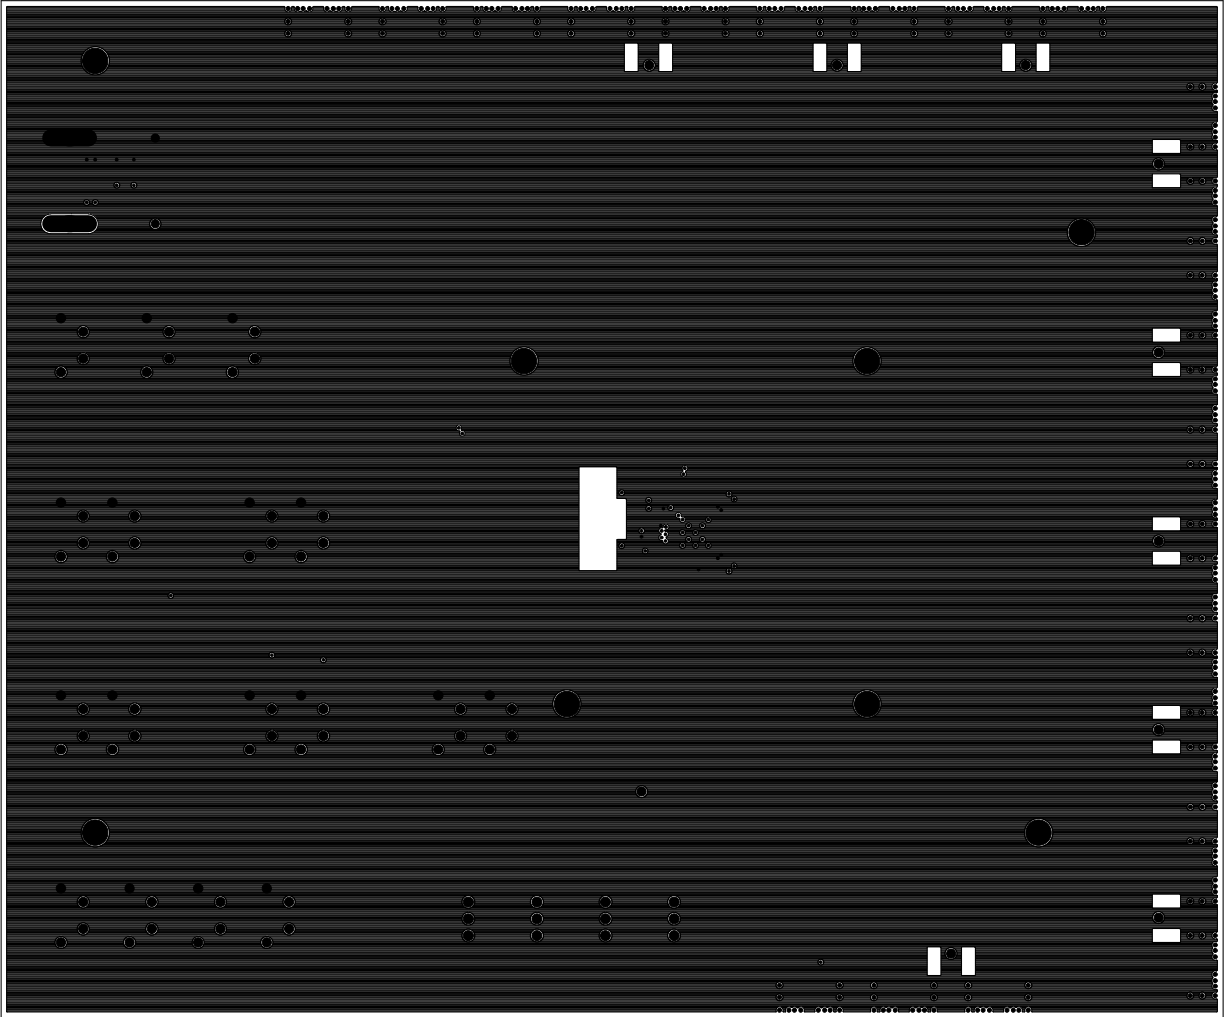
MAX3639 EV Kit PCB Layout—Power Plane
